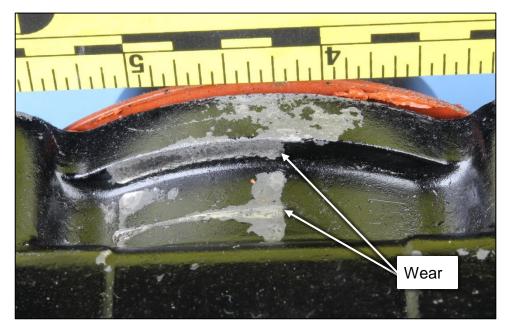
View of the lower side of the magneto showing wear at the clamping face of the attachment flange and the adjacent surface.
